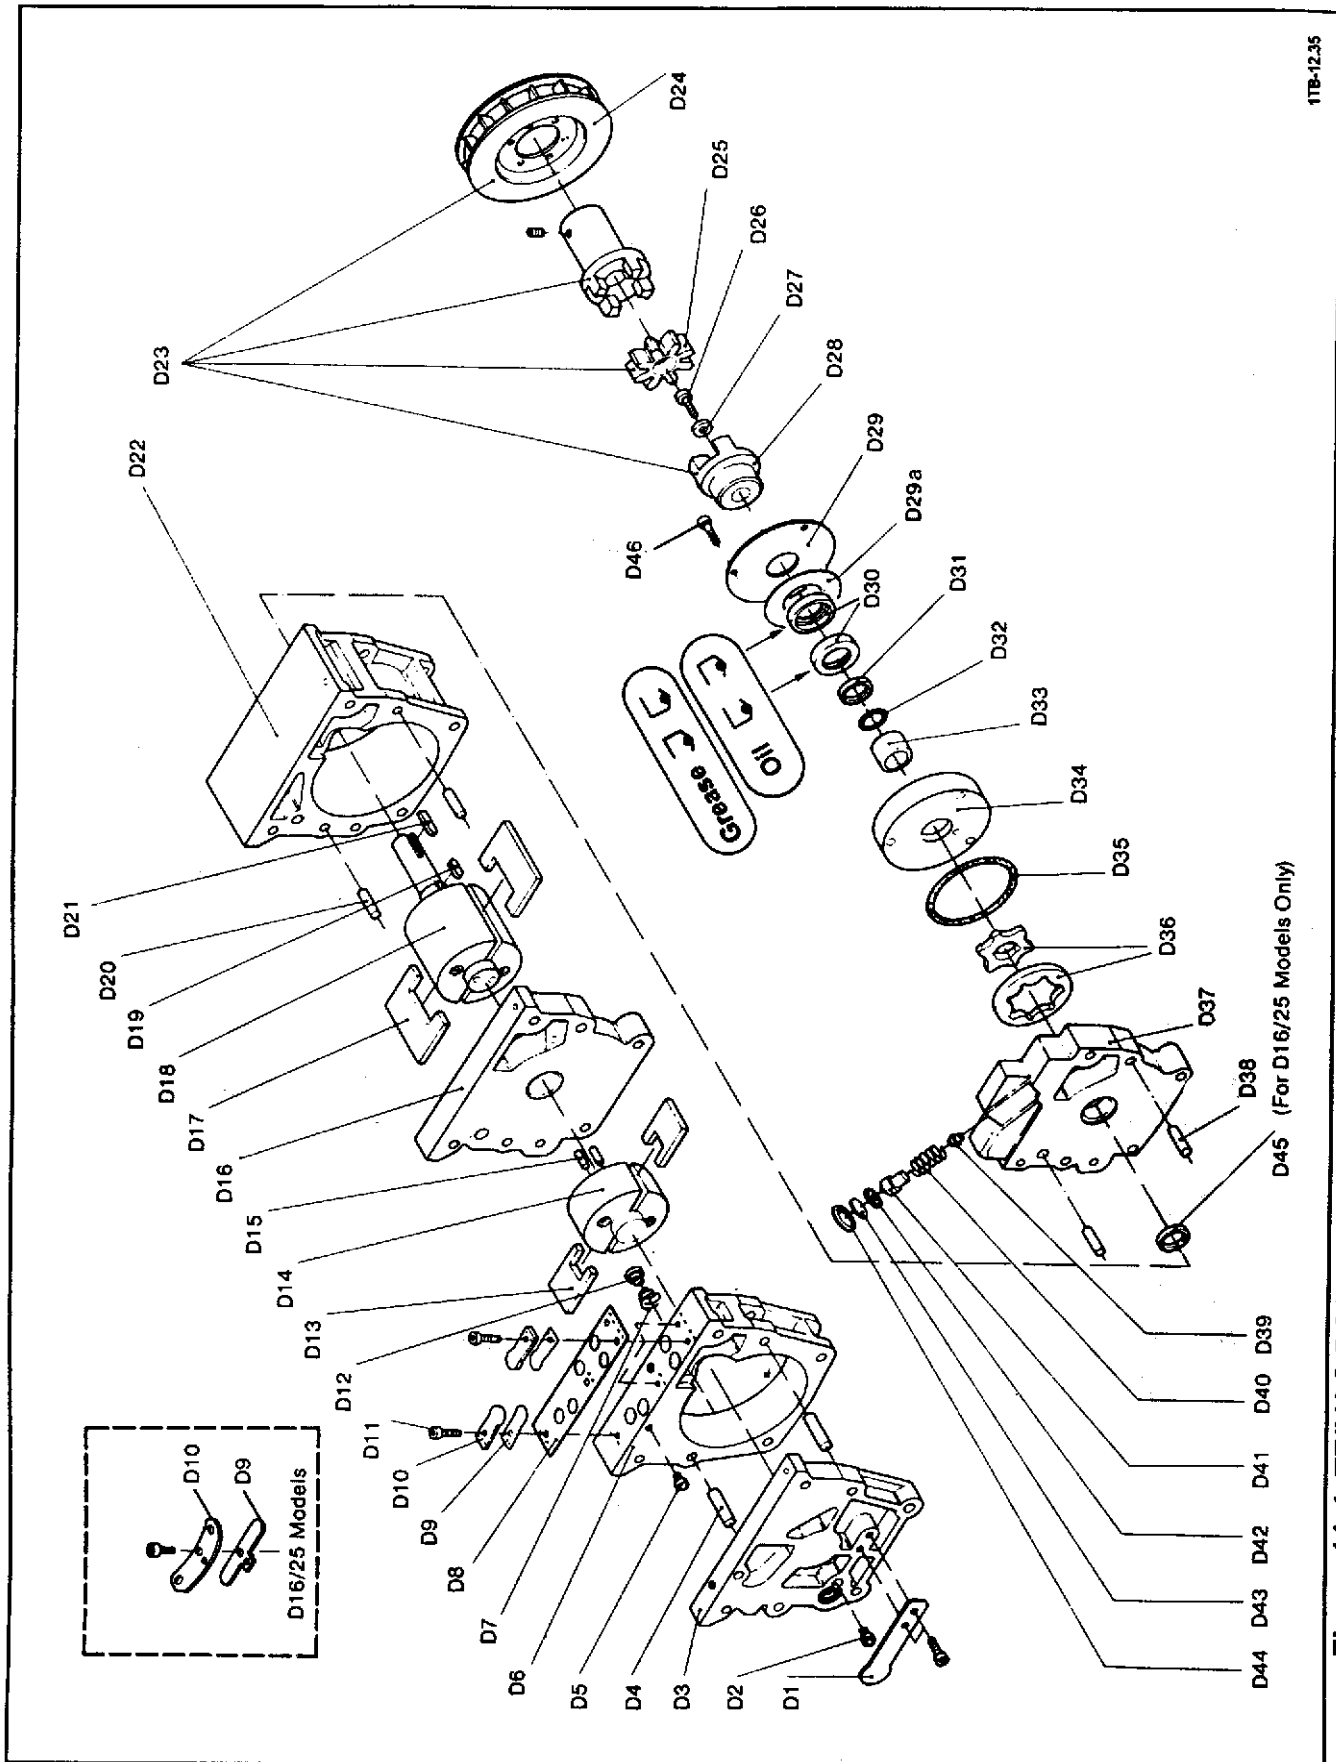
TRIVAC BCS Pumping Module (see Table 11-A for the part number of the complete pumping module assembly)
